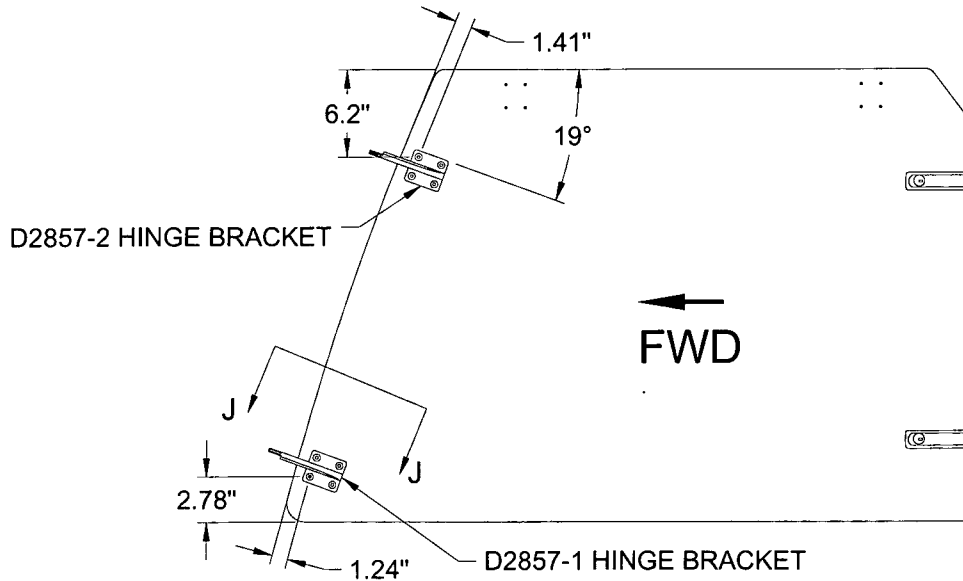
(a). HINGE BRACKET POSITION ON LH D3186-1 SPACEPOD DOOR
